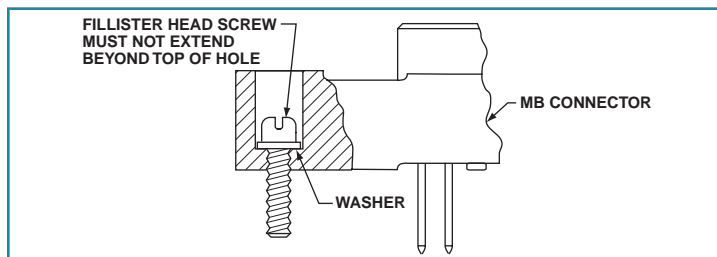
MB CONNECTOR WITH SCREW MOUNTING
